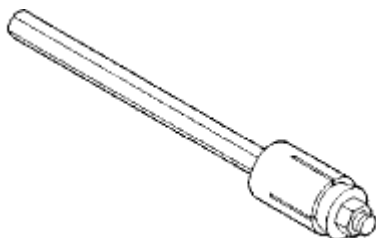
Tool, Differential Bearing Torque - C-4995A
